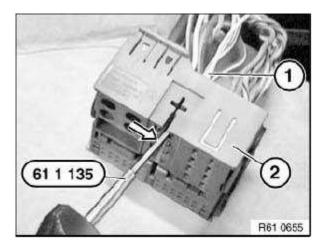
Identifying Special Tool (61 1 135) Courtesy of BMW OF NORTH AMERICA, INC.
